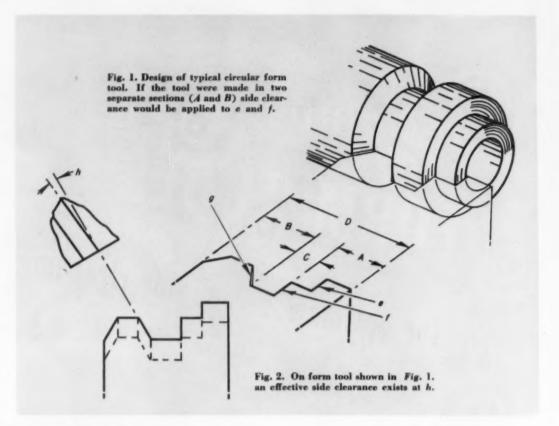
shows a typical example. If the form tool shown were made in two separate sections (A and B), side clearance would naturally be applied to surfaces e and f. Sharpening would, of course, increase distance C, necessitating the resetting of tool A after sharpening.
